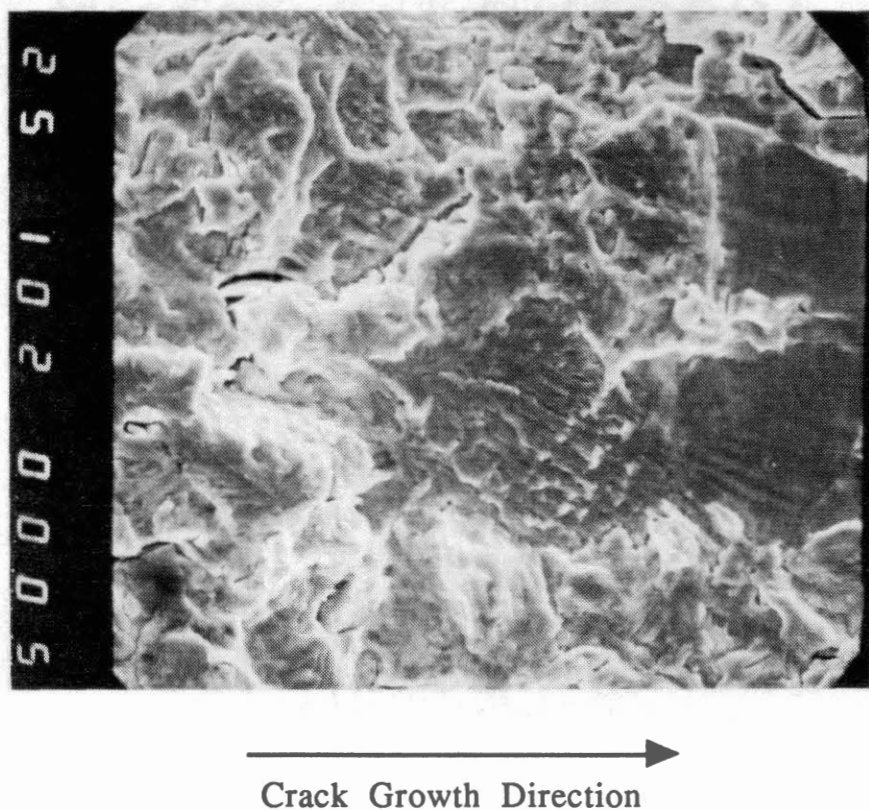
An Example of Evident Abrasive Damage on Fracture Surface (Trial Specimen)
